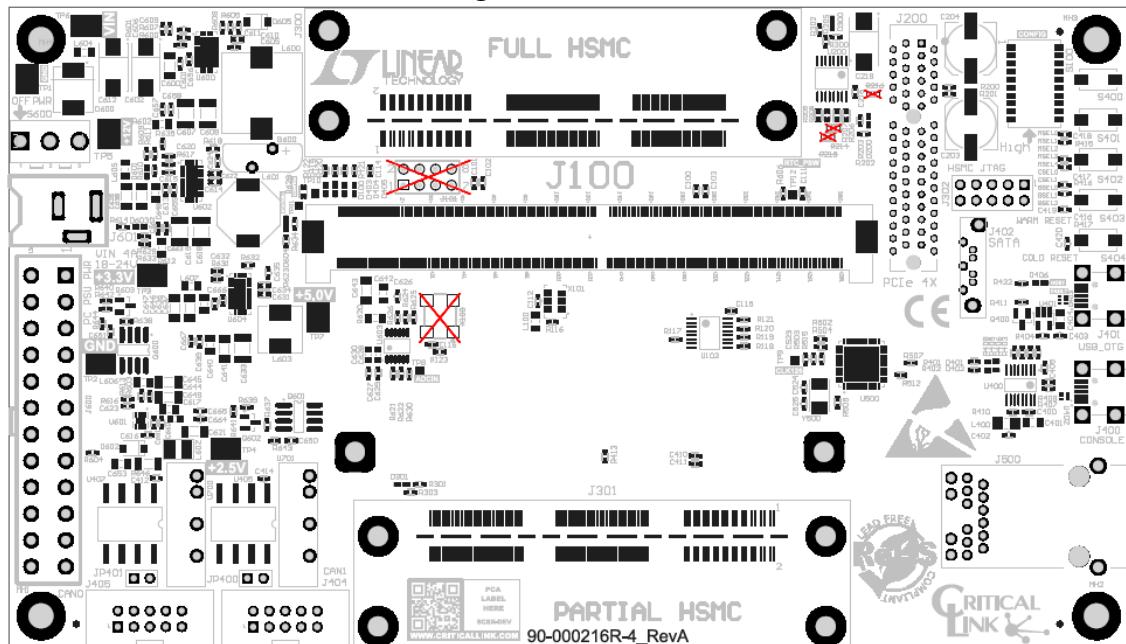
MitySOM-5CSX Development Kit Outline, Mounting Hole Locations,
